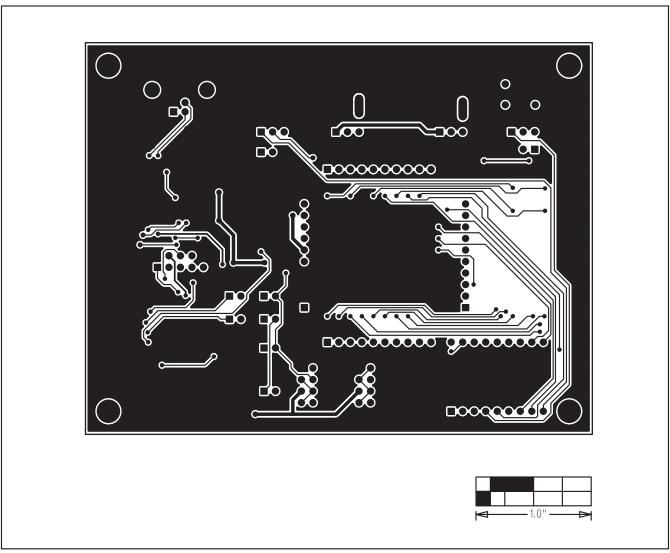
MAX6956 EV Kit PCB Layout—Solder Side
